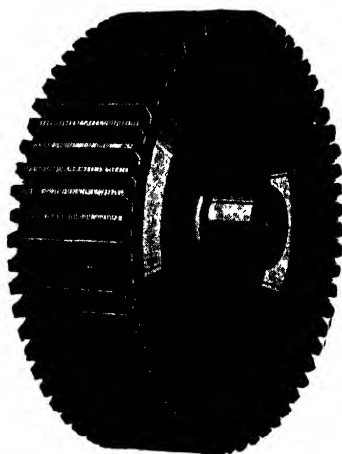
Non-Metallic Cut Spur Gear; Silent Gear with Steel Center
